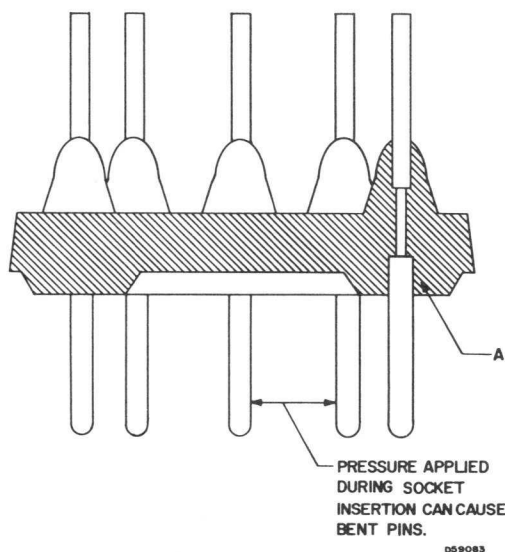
Typical cross-section of a miniature tube pin where it passes through the glass header.
